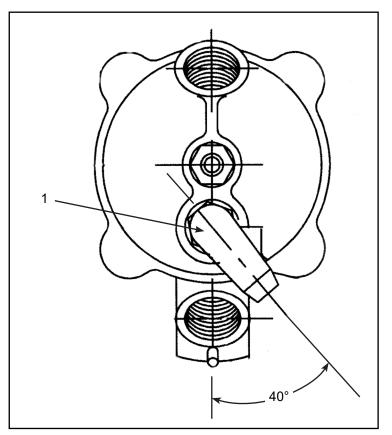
Exhaust Bypass Valve P/N 470842-0009
